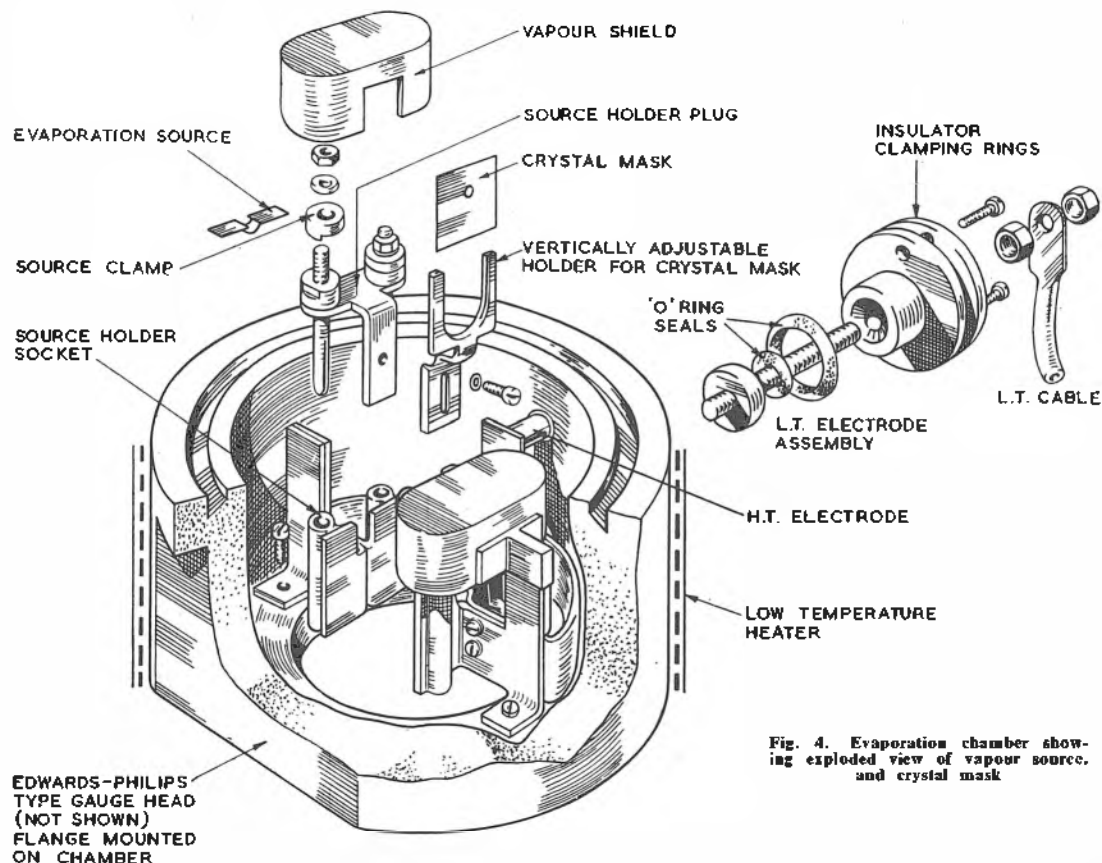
Evaporation chamber showing exploded view of vapour source, and crystal mask
